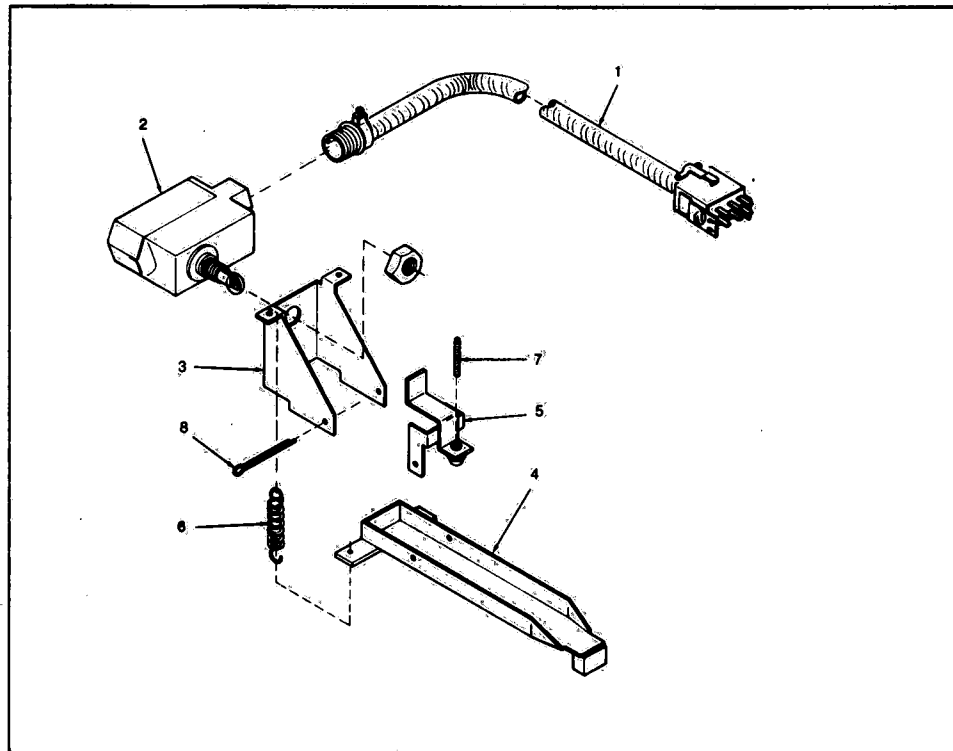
A. DOOR SWITCH ASSEMBLY (For Units Shipped After 9/76).
